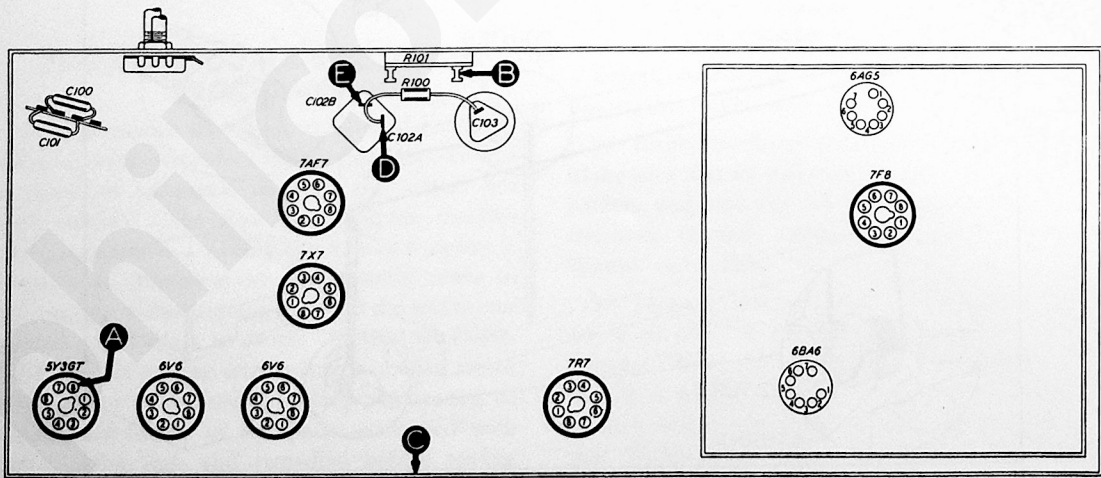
BOTTOM VIEW, SHOWING SECTION 1 TEST POINTS.
